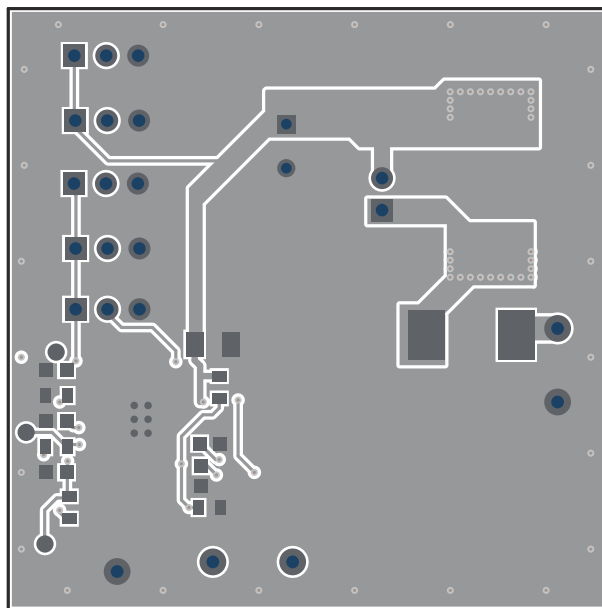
Bottom Assembly Layer (viewed from bottom)
